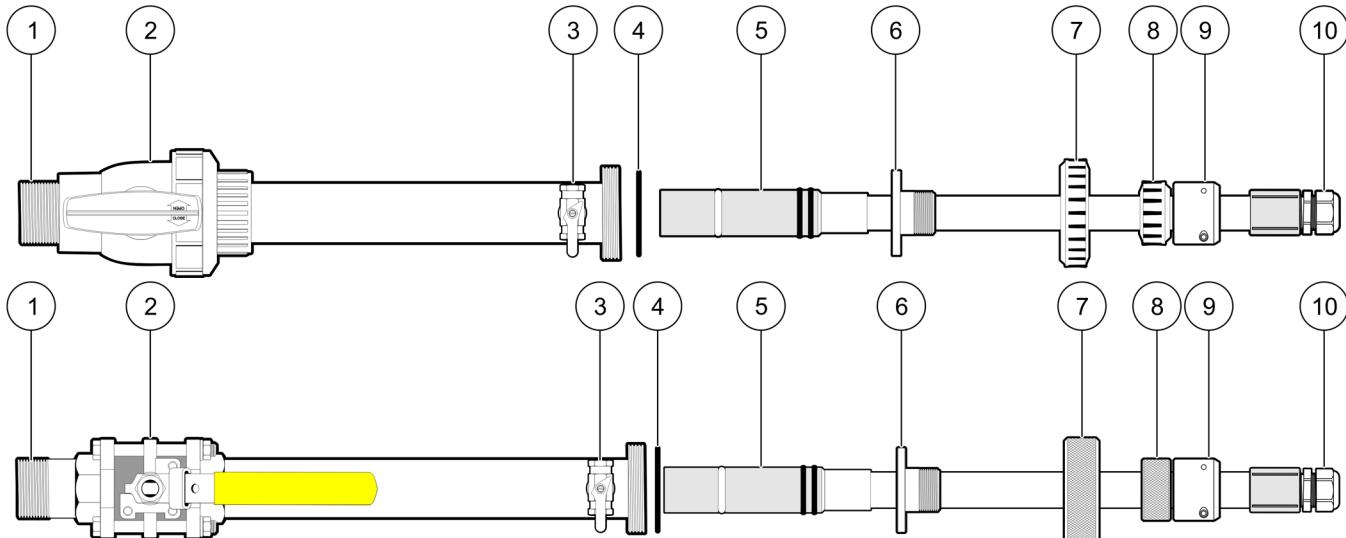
CPVC and Stainless Steel Insertion Mounting Hardware
